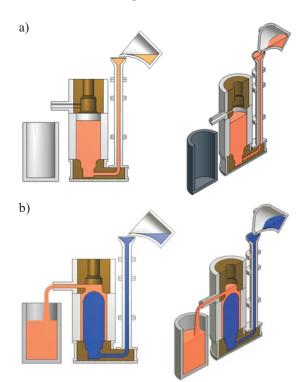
The bimetallic rolls casting scheme - a) phase I (rolls' body casting); b) phase II (rolls' necks and core casting)
